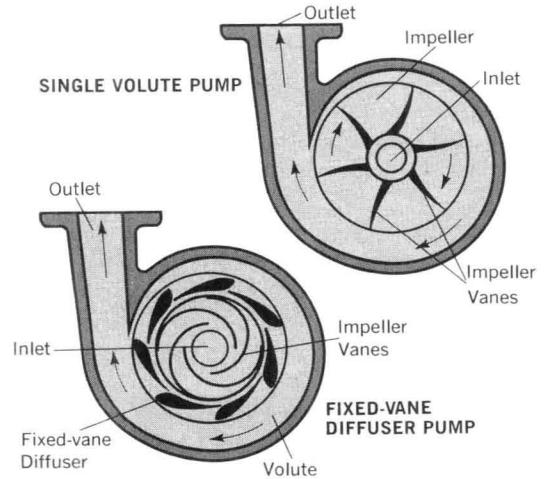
Single Volute Pump and Fixed-vane Diffuser Pump. In both pumps the fluid leaving the impeller moves through an expanding spiral casing, increasing the pressure of the fluid.
